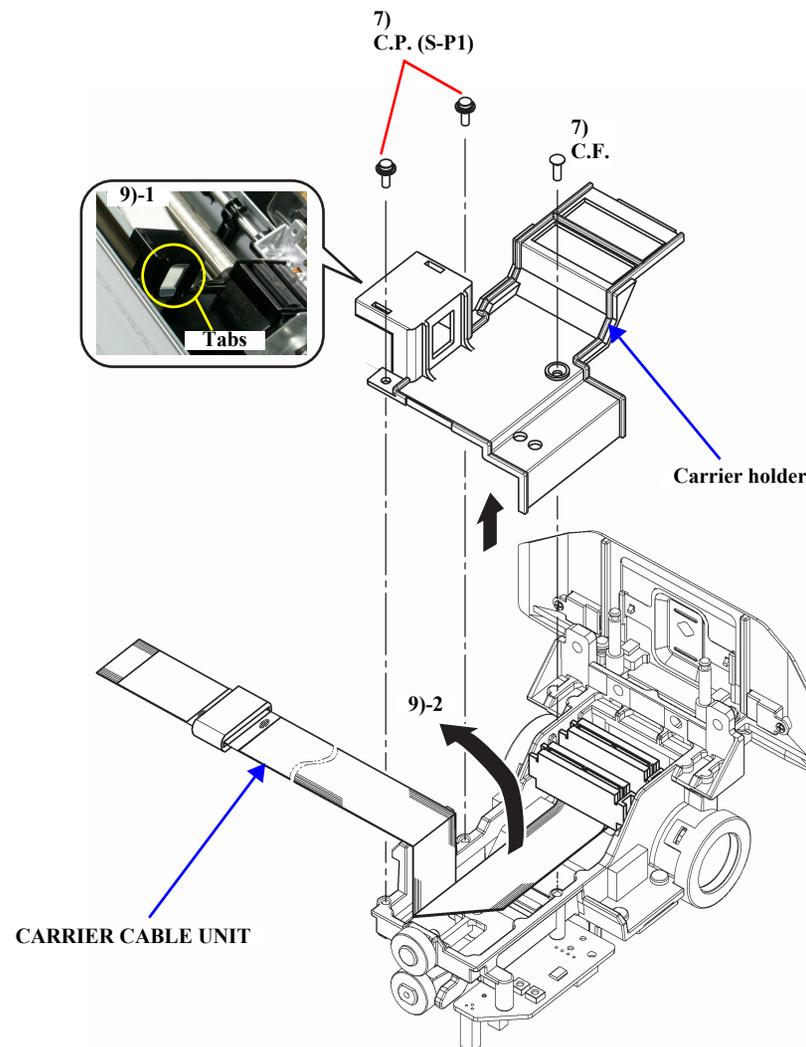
CARRIER CABLE UNIT Removal (3)
